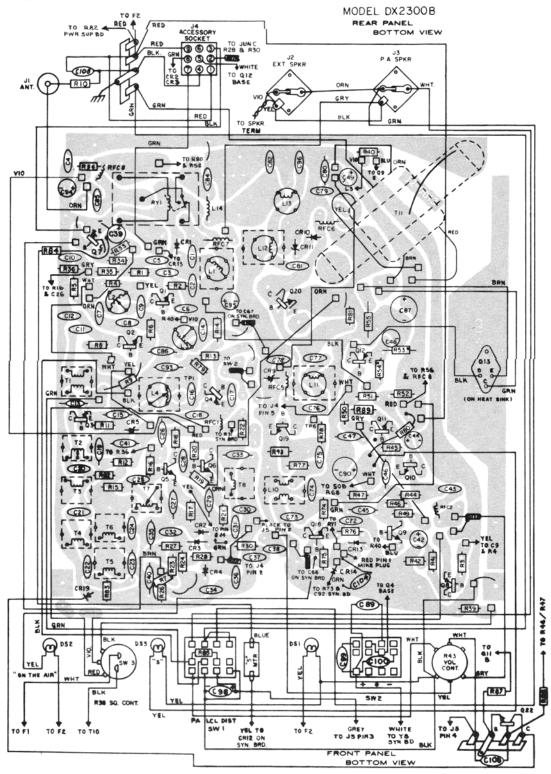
Main Board Parts Locator (CB DX2300B)
